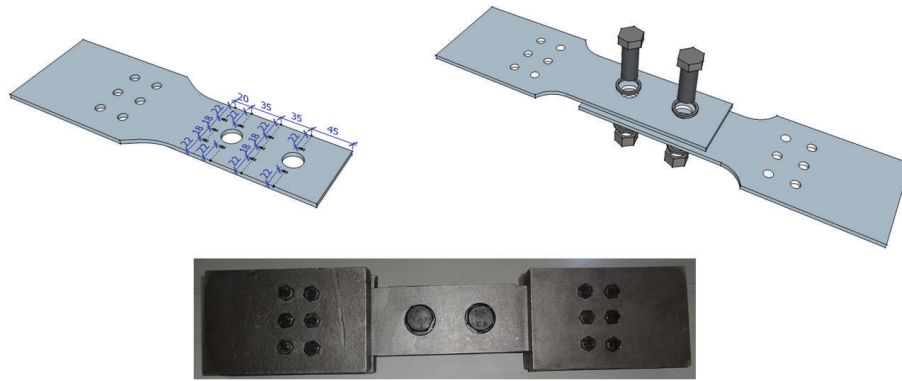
Schematic of specimens and the assembling, dimensions in mm.
